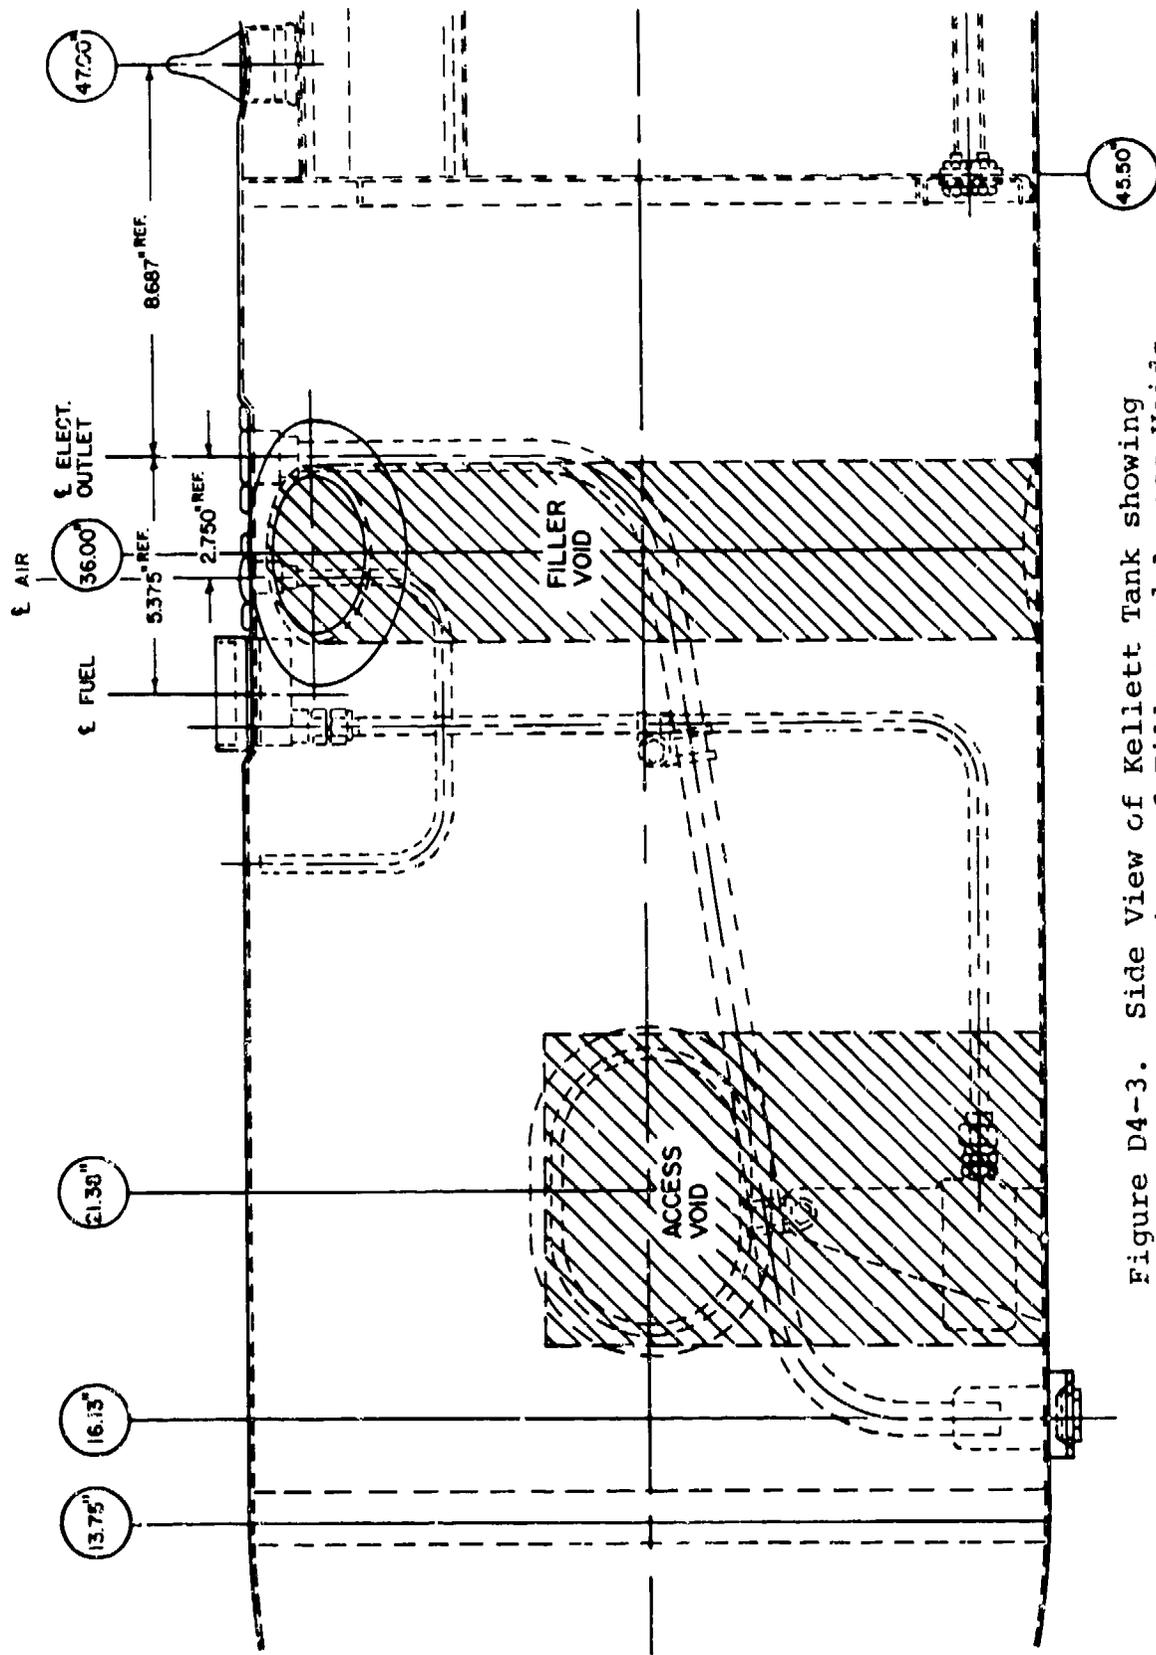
Side View of Kellett Tank showing Locations of Filler and Access Voids
